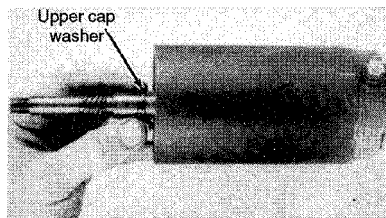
If removed, slide the upper cap thrust washer onto the shaft...
